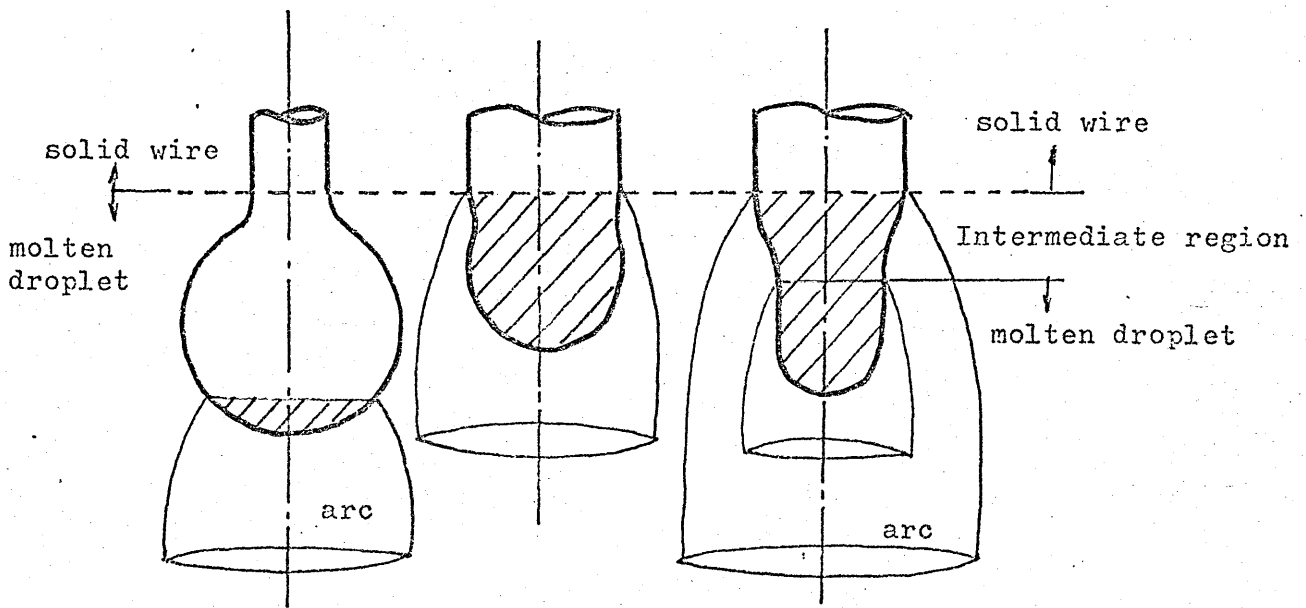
Approximate molten tip shapes for electrodes in consumable arc welding (89)
